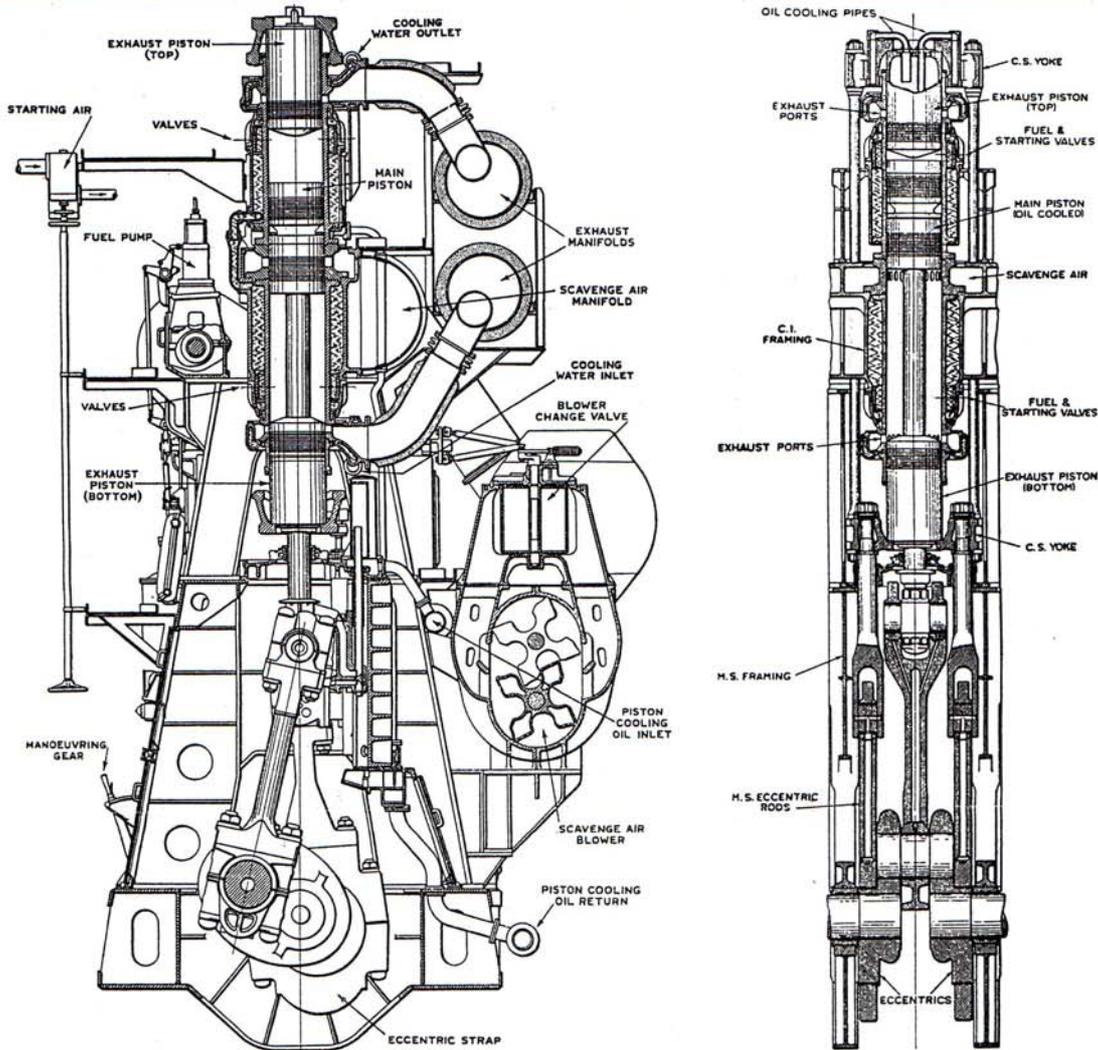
SECTIONS THROUGH HARLAND & WOLFF TWO-STROKE, DOUBLE-ACTING, OPPOSED-PISTON DIESEL ENGINE
